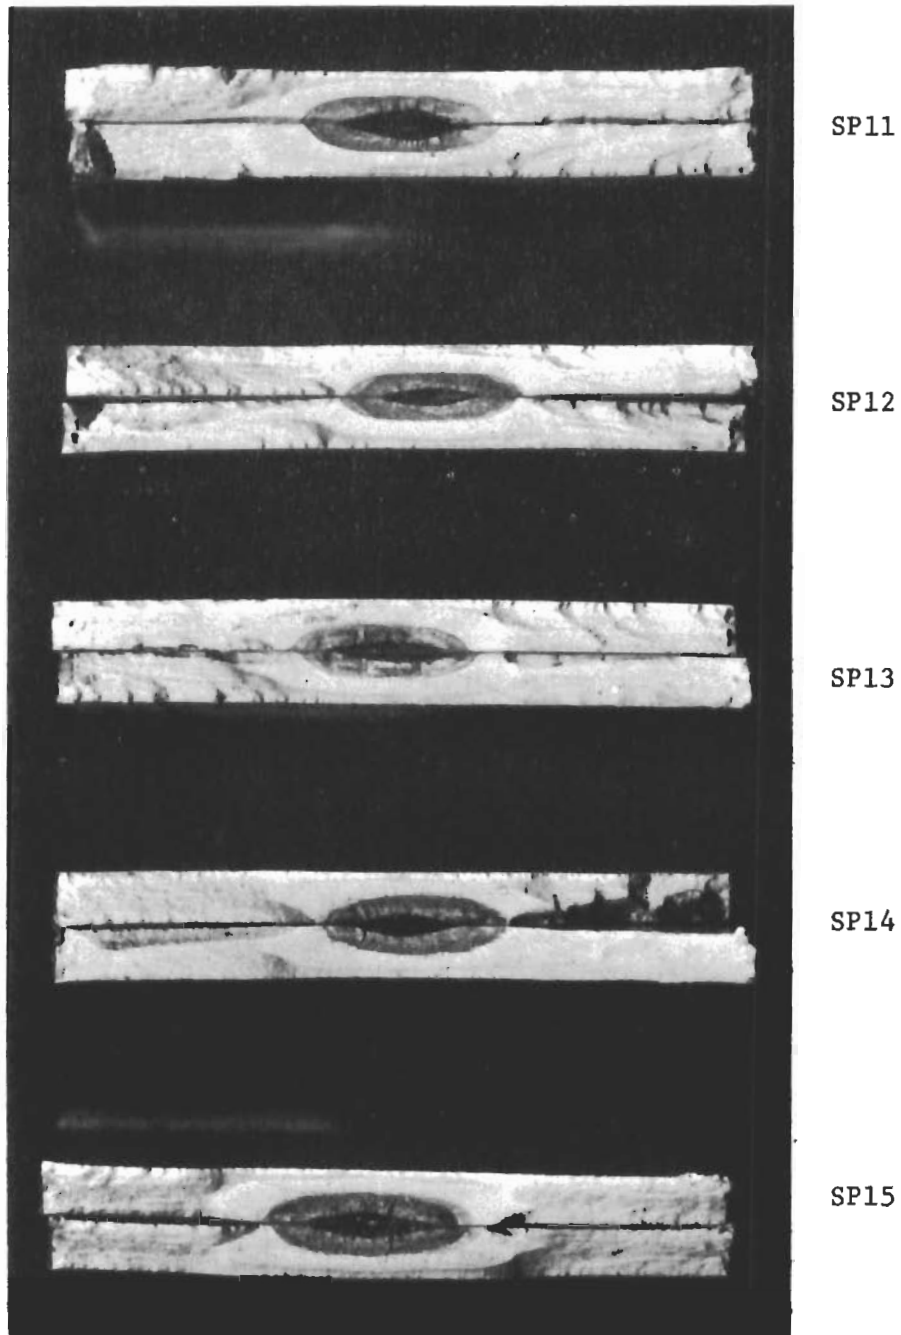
Part-Through-Crack Fracture Surfaces - Illustrating Crack Growth Beyond Fatigue Starter Flaw - Titanium STA 0.1 in.
